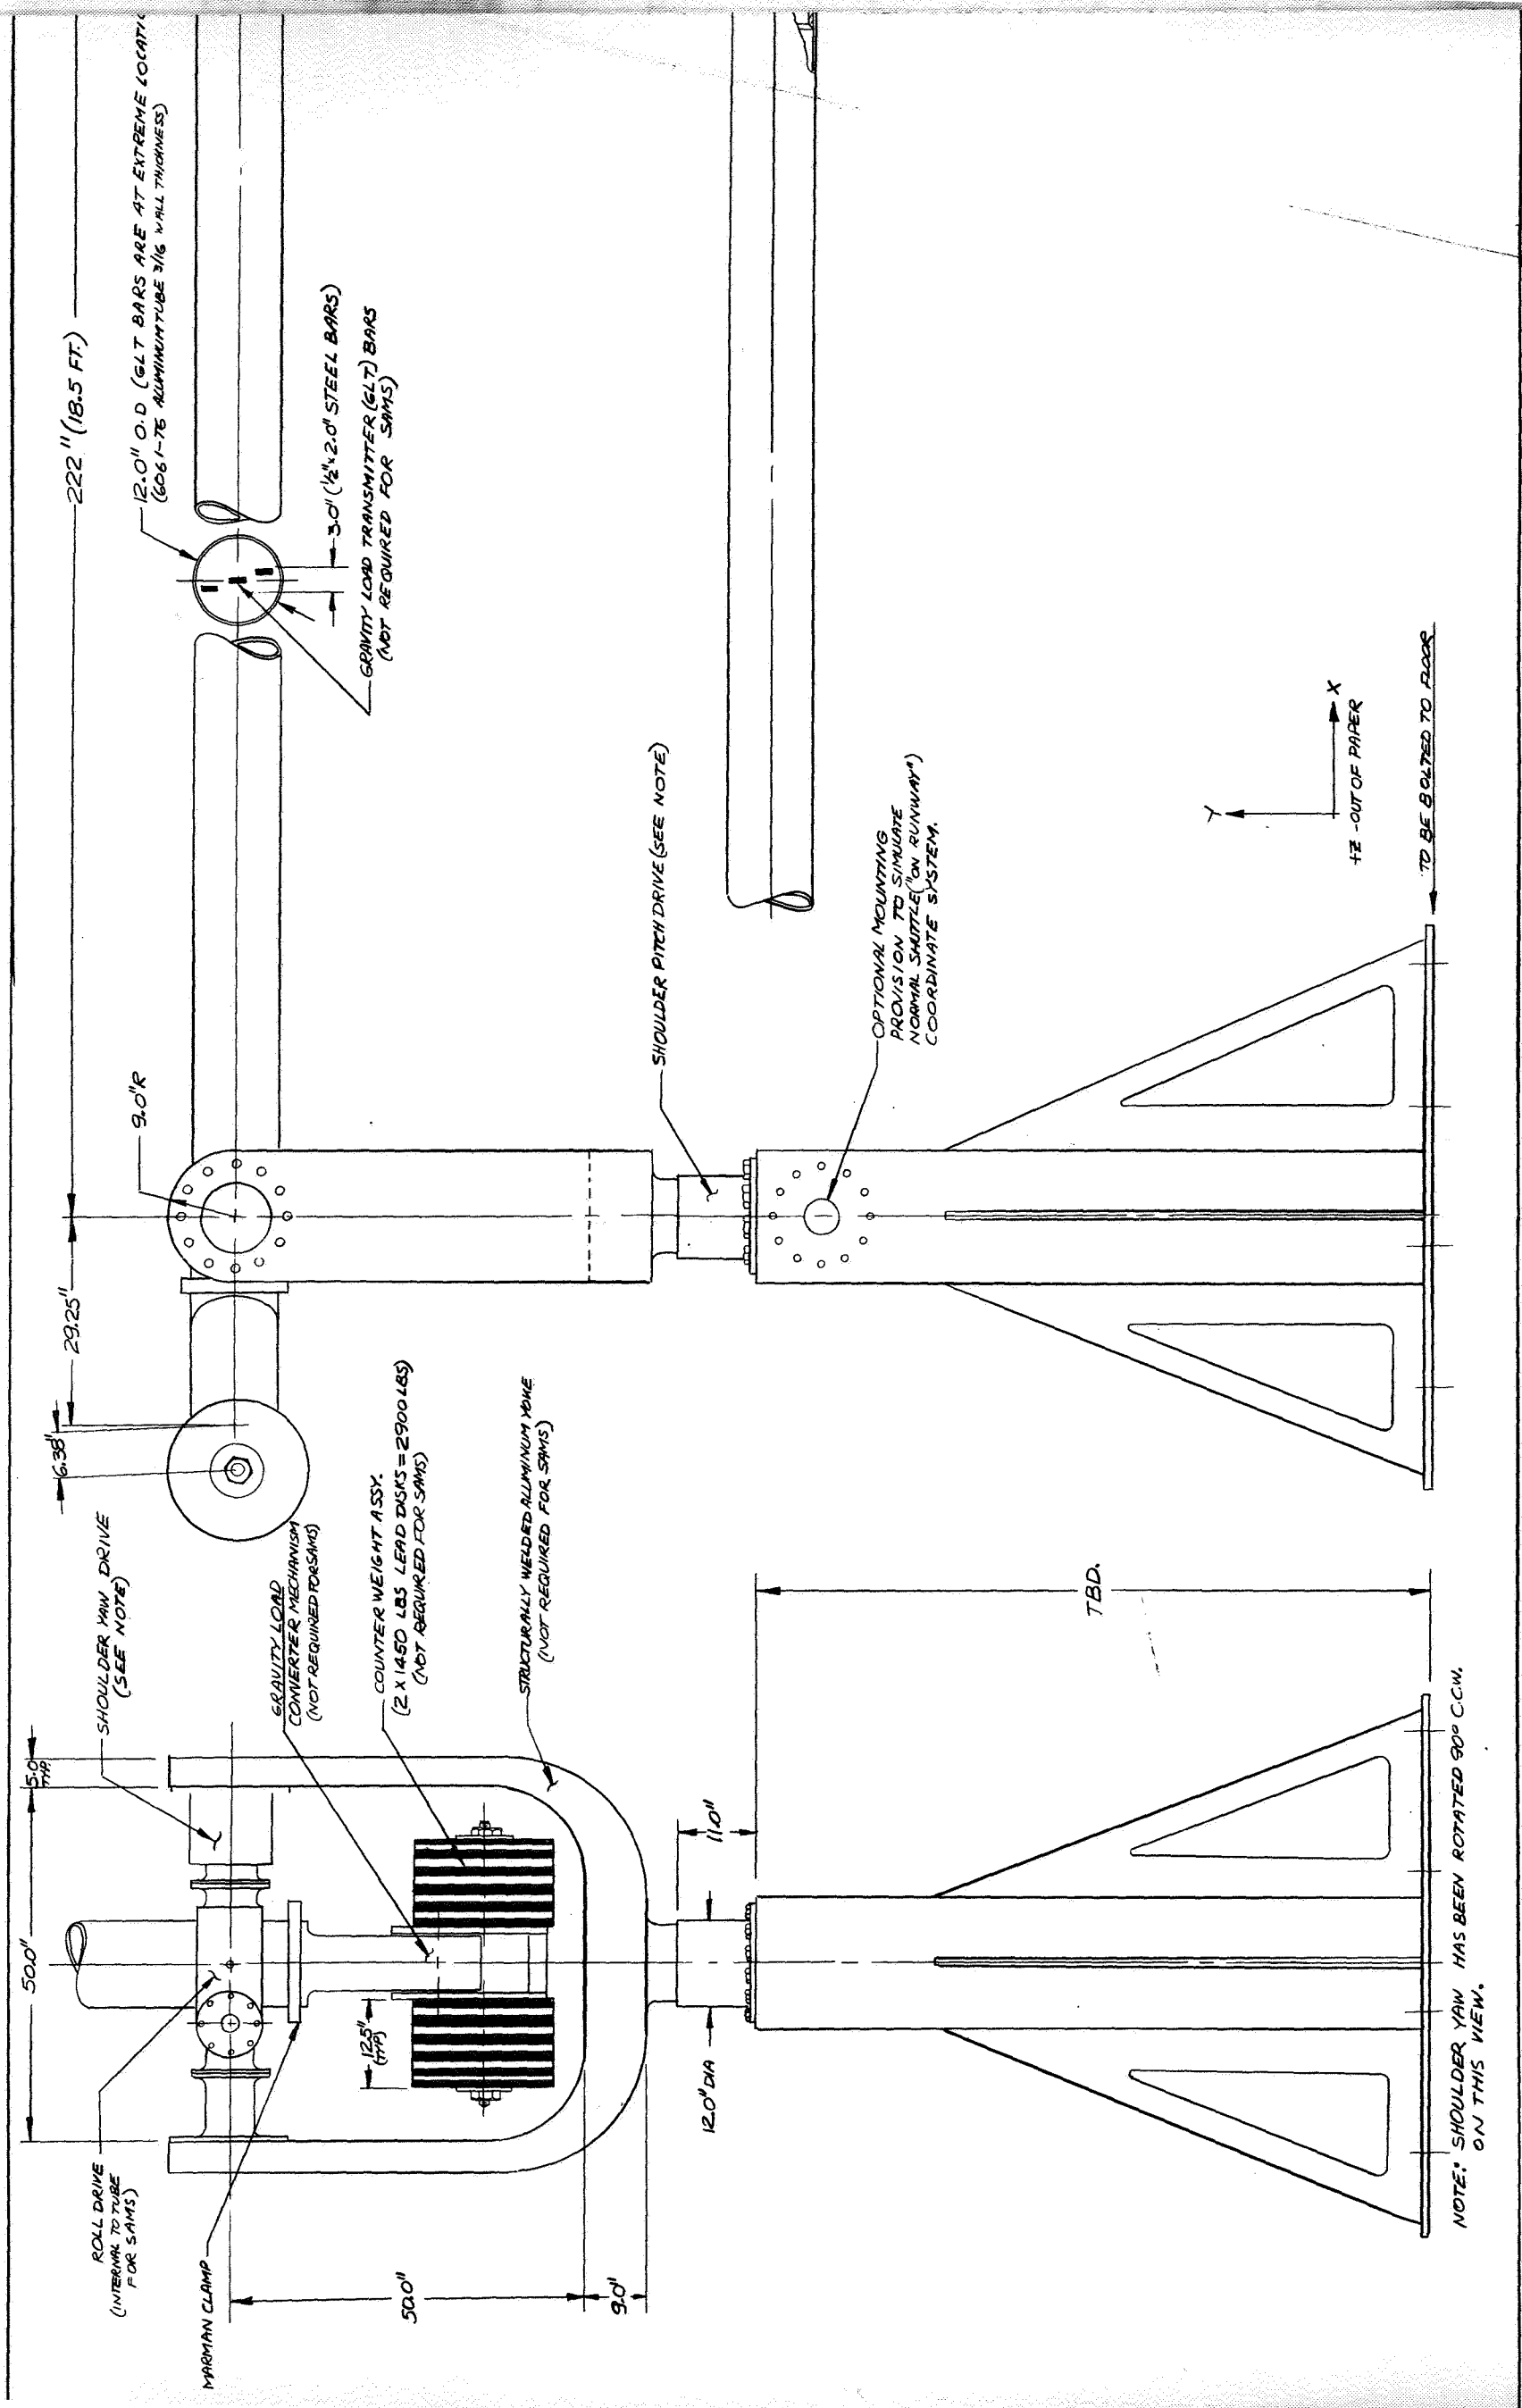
Assembly Drawing of Counterbalanced Manipulator
